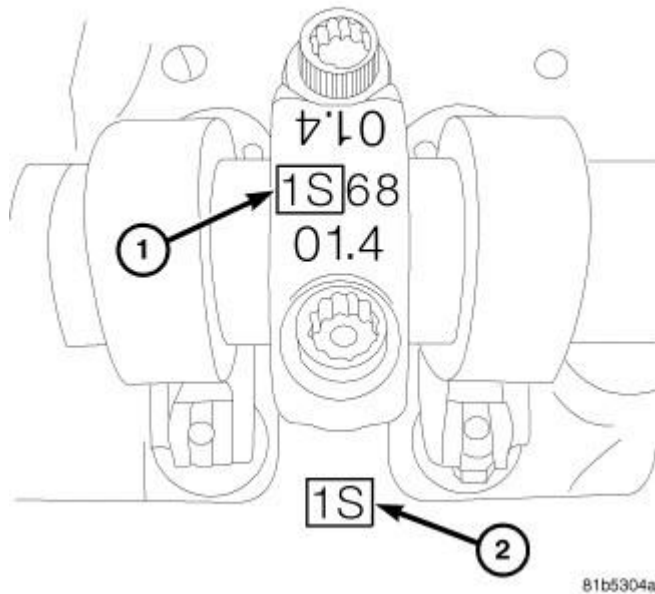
Identifying Camshaft Cap & Cylinder Head (Exhaust Side) Markings
